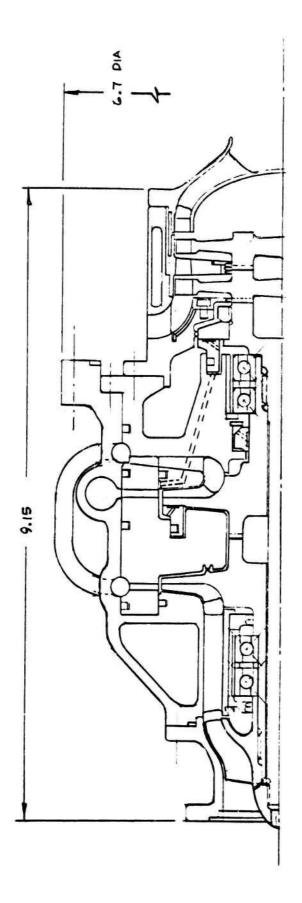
10K Fuel Turbopump Concept, I - Back-to-Back Unshrouded Impellers
